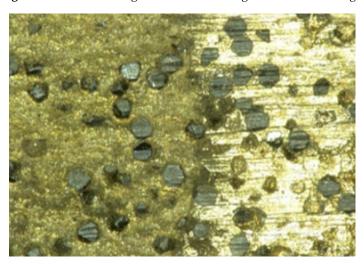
Topography and landform of bronze diamond abrasive grinding wheel after multi-pulse fiber laser dressing.
